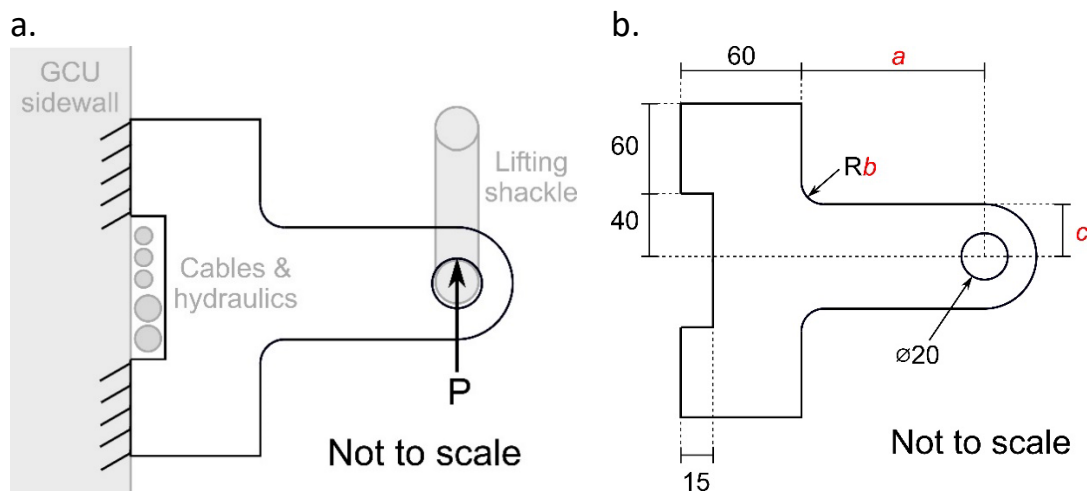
Proposed design of the GCU lifting lug. a.) Overall design showing loading and attachments to the GCU body. b.) Dimensions of the lifting lug (in mm). The values of dimensions a and b can be found in Table 2.
